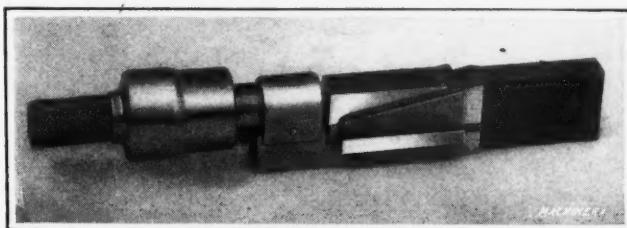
Hanson Precision Measuring Device with Upright and Sliding Head removed, showing Tapered Wedge
